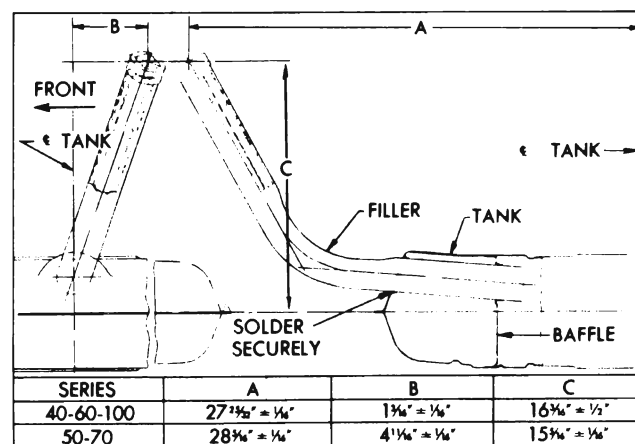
Location Dimensions for Installing Gasoline Tank Filler
